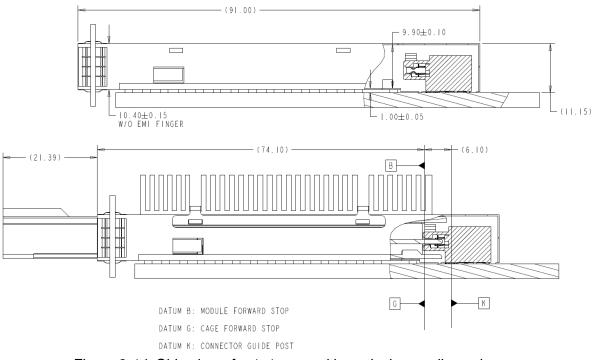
Side view of a 1x1 cage with vertical cage dimensions
